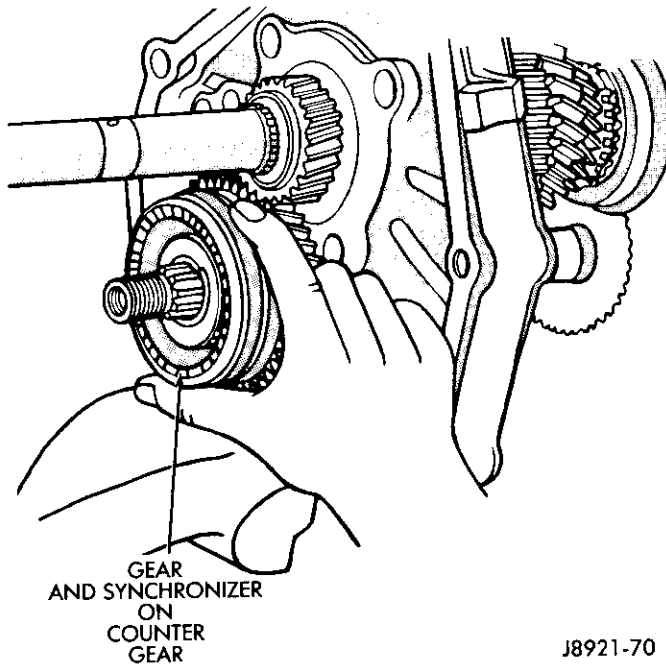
Installing Counter Fifth Gear And Synchronizer — AX 5
